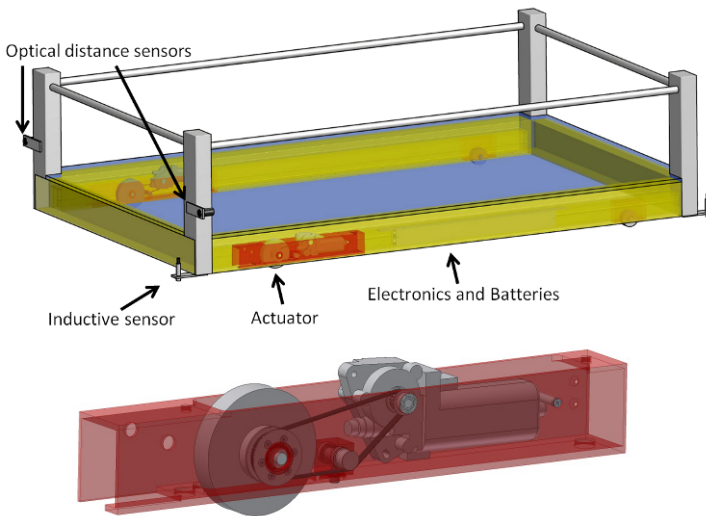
CAD Model of Platform and Detail of CAD model of Actuator with DC motor
